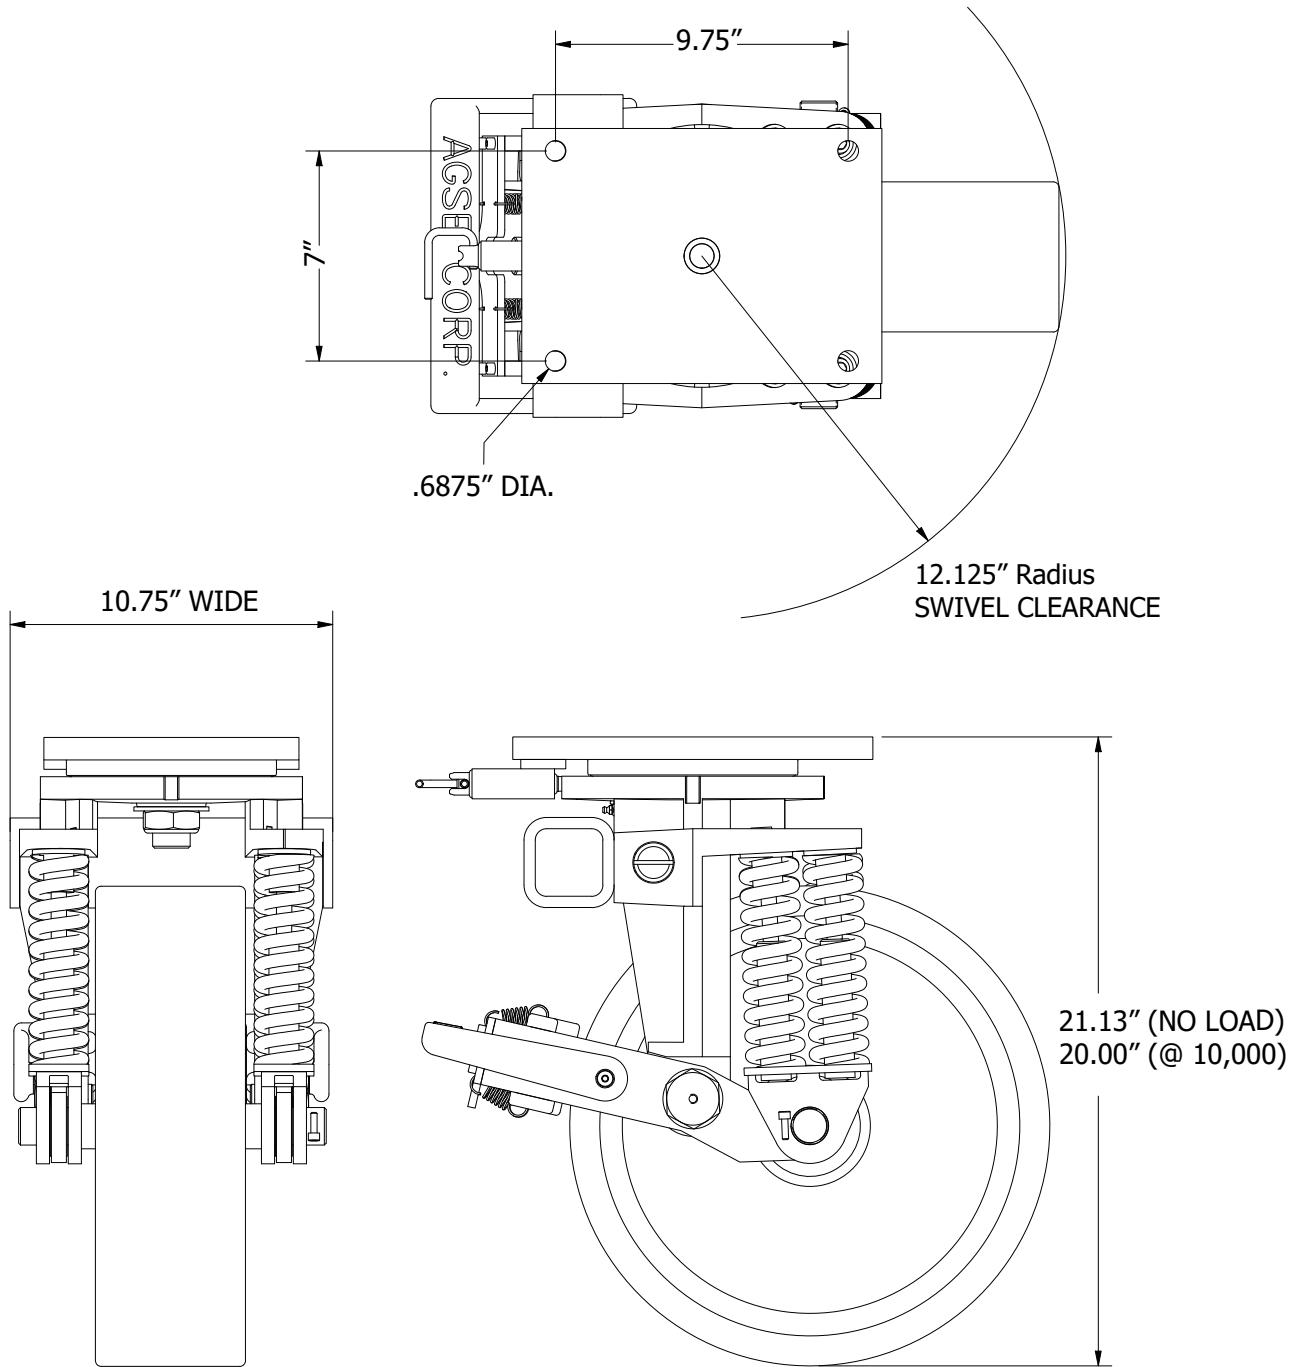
Dimensions and Clearances for AM-2079-20 (10,000 LBS -16" Diameter)
